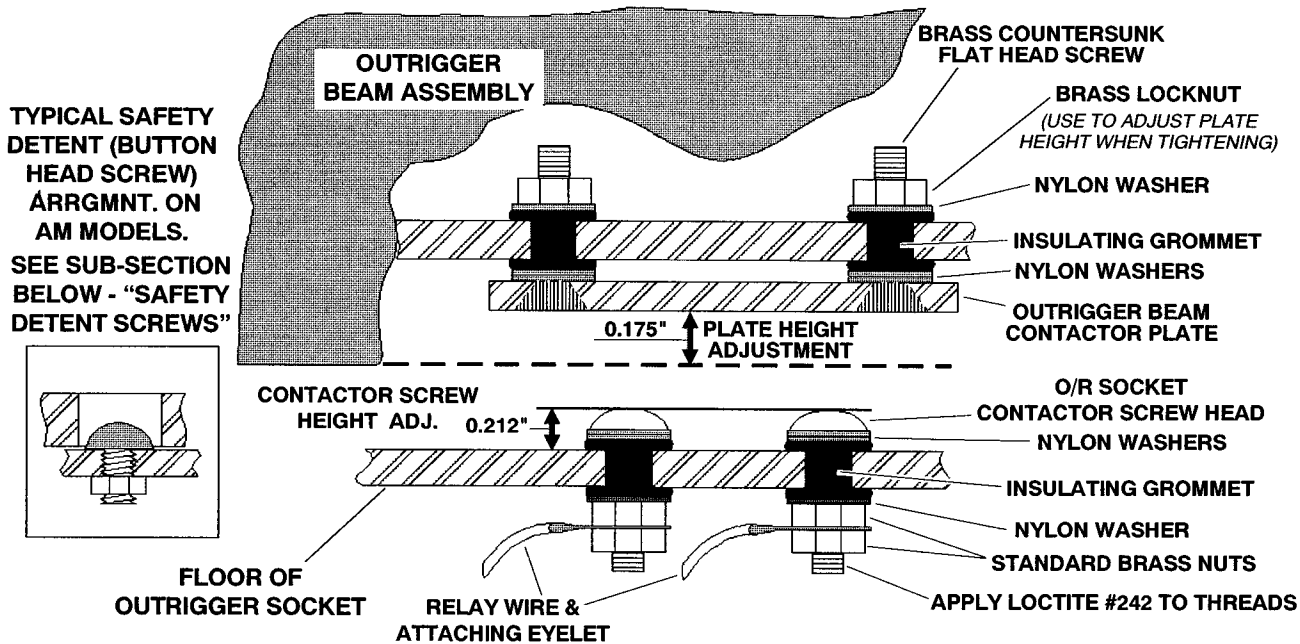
Base Frame Outrigger Socket Contactor Heads and Outrigger Beam Contactor Plate.
